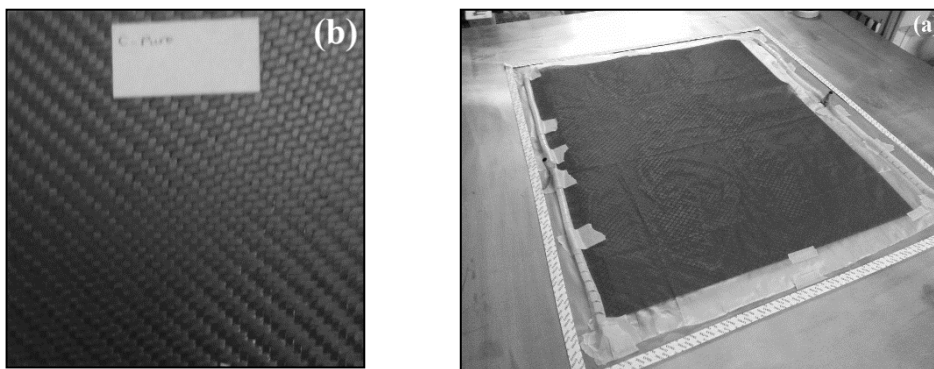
a) Composite plate made by vacuum infusion technique, b) composite specimen for impact test
